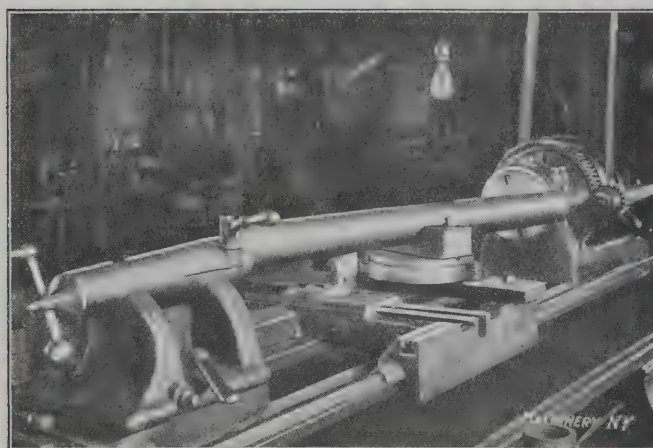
Turntable for Reversing Heavy Work in the Lathe
